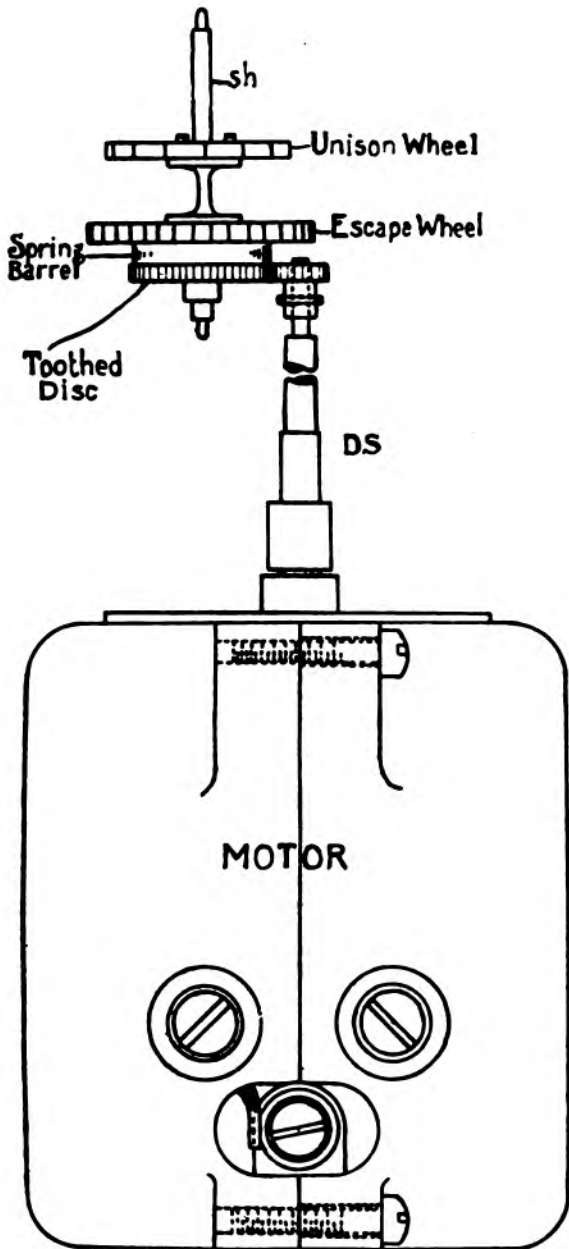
THE SUNFLOWER DRIVING MECHANISM.
